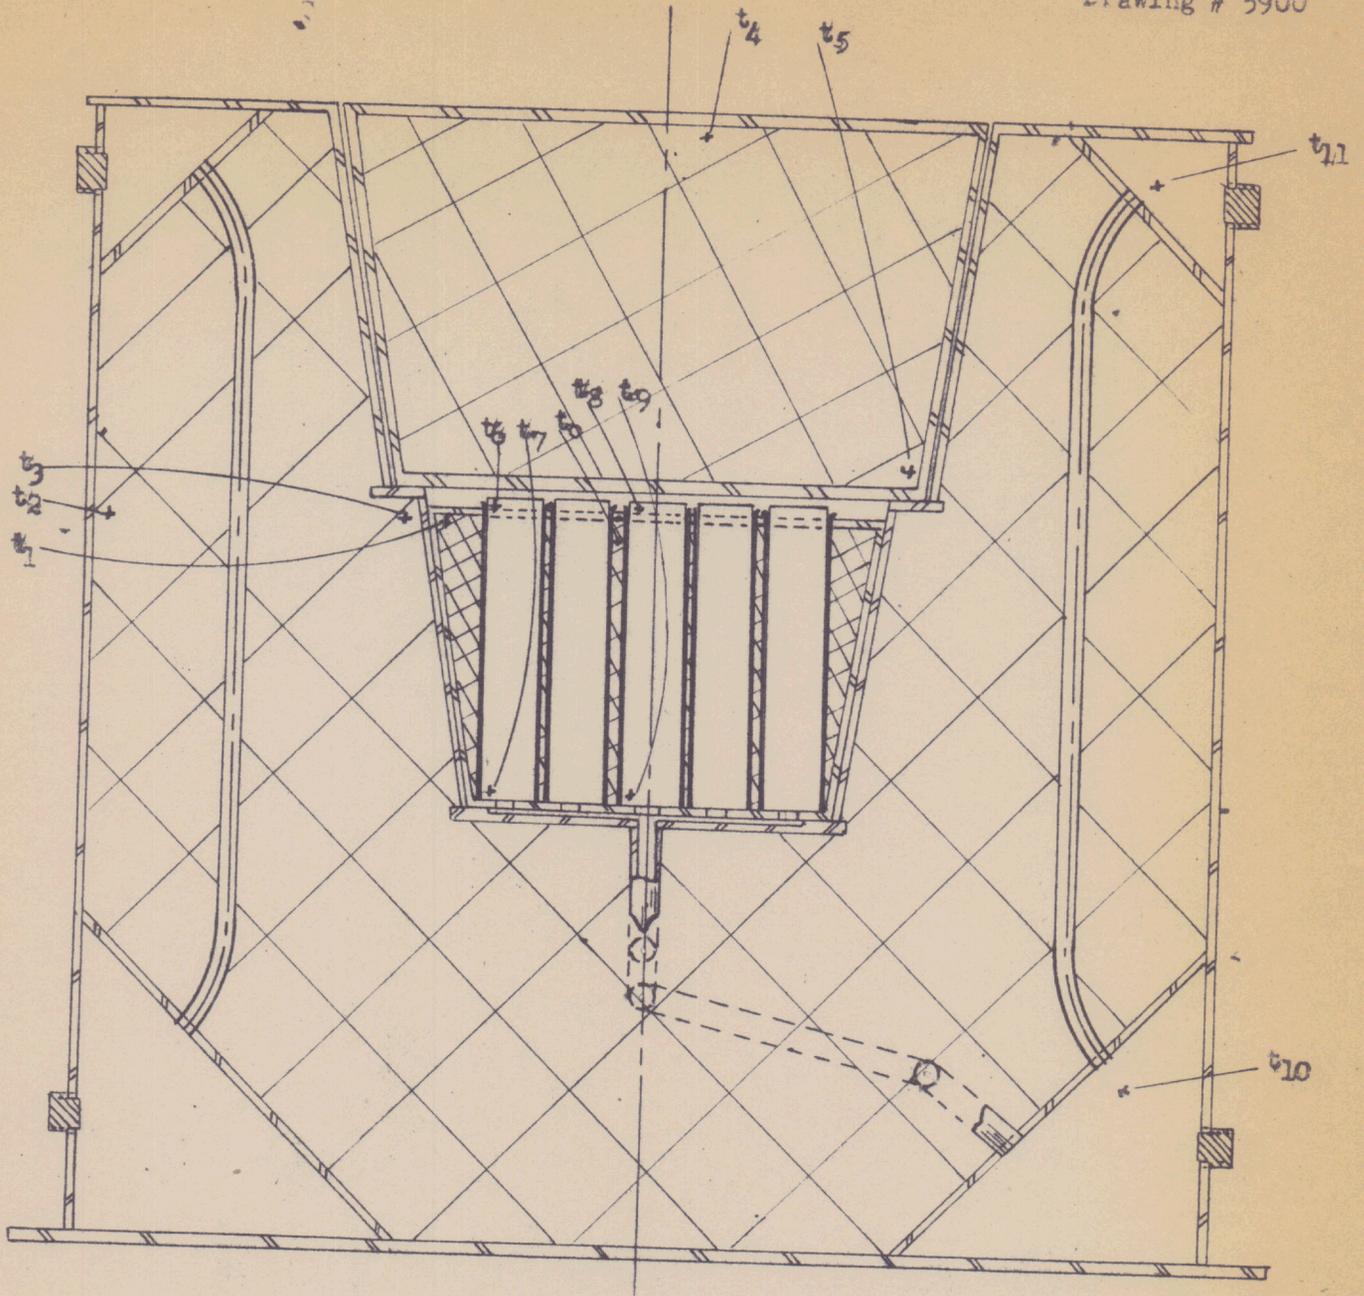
FIGURE I - CROSS SECTION OF CARRIER SHOWING THERMOCOUPLE LOCATION
